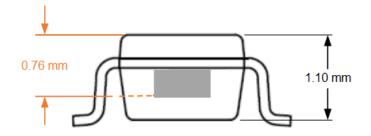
XtremeSense TMR Sensor Location in z Dimension for CT100 in SOT23-6 Package
